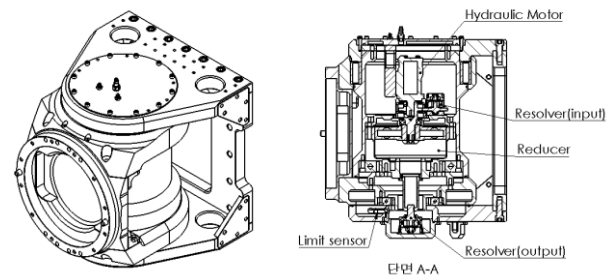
The draft of designed hydraulic actuator module (large revolute module)
